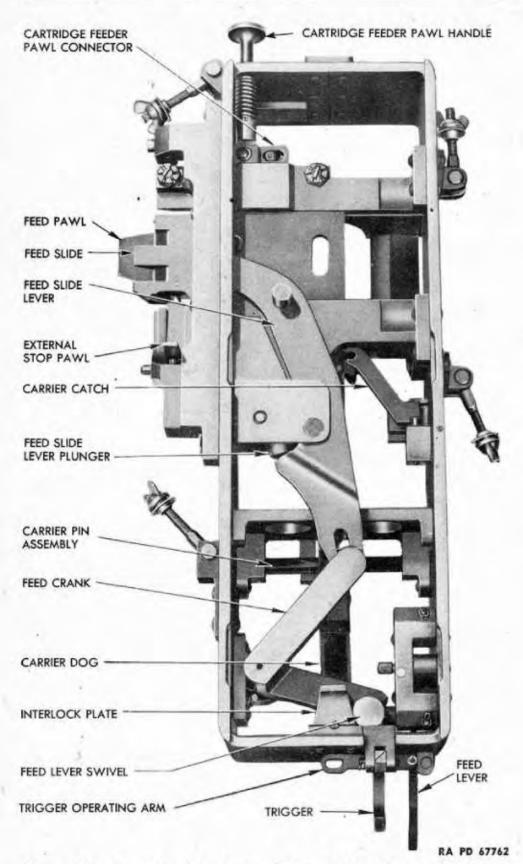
Feed Box Mechanism (Gun M10)—Removed From Gun
